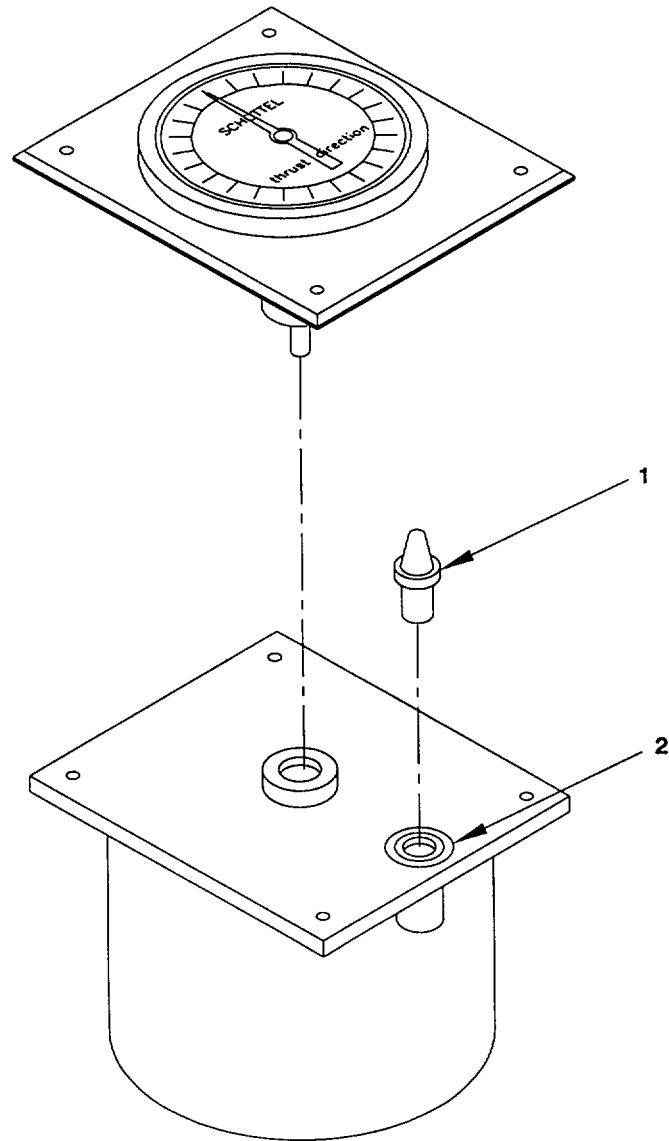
Bulb, Thrust Direction Indicating Device, Middle Control Panel "A1", Remove/Install.
